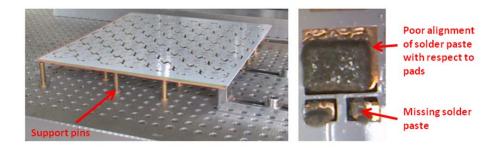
PCB panels should be rigidly supported during solder paste printing to ensure proper alignment between the stencil and the PCB as well as reliable transfer of solder paste onto the PCB. A rigid support panel is preferred over multiple support pins, especially for PCB panels with v-scores or perforated holes for de-panel purposes.
